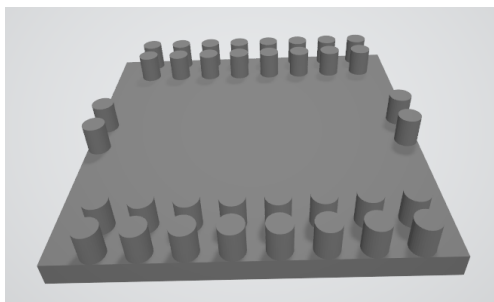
Tubing guiding part with a 3 mm thick bottom, 4 mm high pillars of 3 mm diameter. Dimensions stated in Figure C.4.
